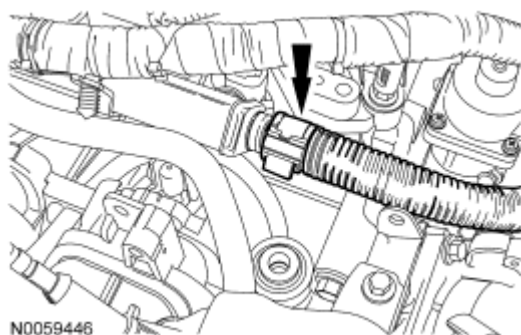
Identifying Fuel Supply Tube Quick Connect Coupling
